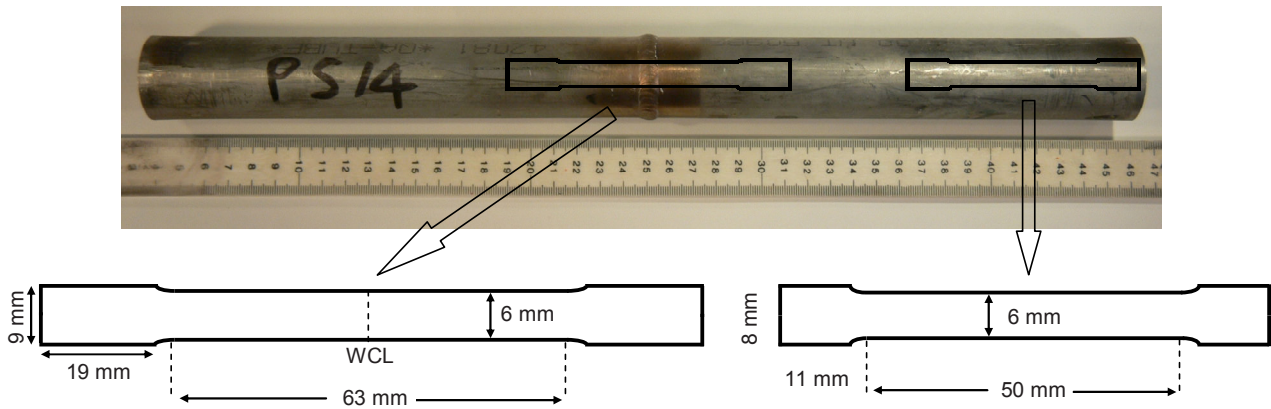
The cut position (top) and the dimensions of the cross-weld test specimens C_0 , C_{10} and C_{20} (bottom left) and tensile specimens B_0 , B_{10} and B_{20} (bottom right). Both types of specimen were 3mm thick.
